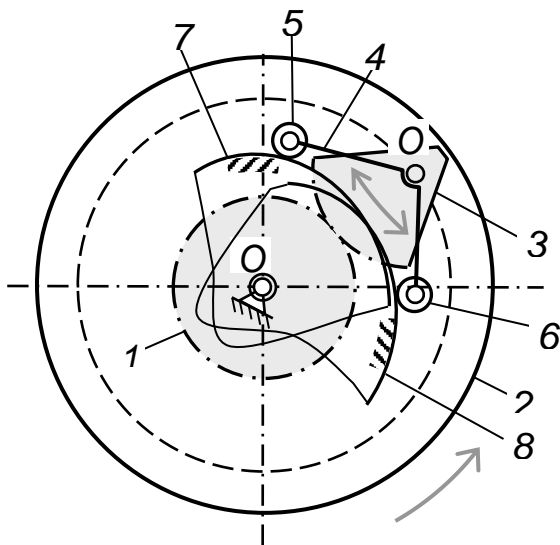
Scheme of the combined cam-gear mechanism that provides movement of the driven link with prolonged stop
